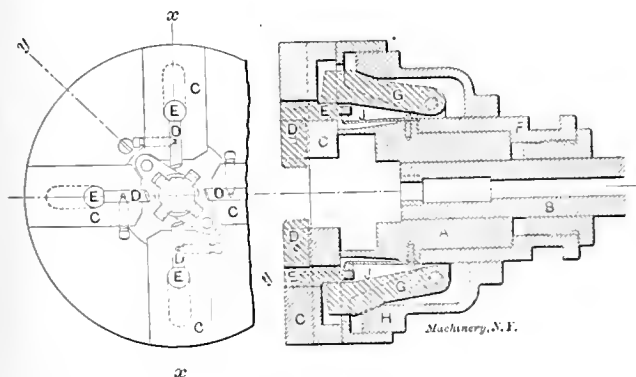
Face View of Die Head and Section on Line x-x, through Die Blocks, with Reamer Removed
